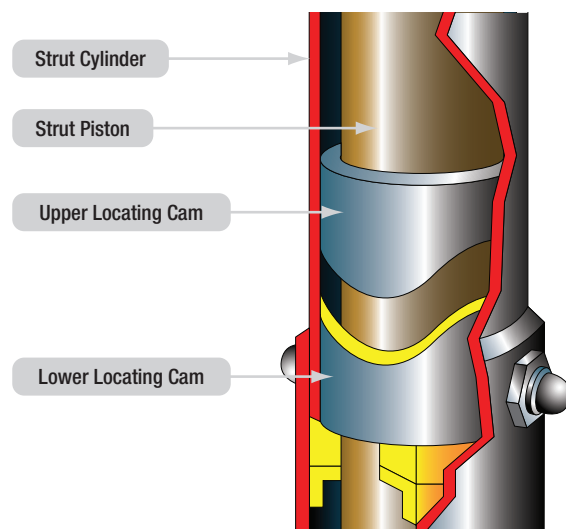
A cutaway view of a nose gear internal centering cam.
